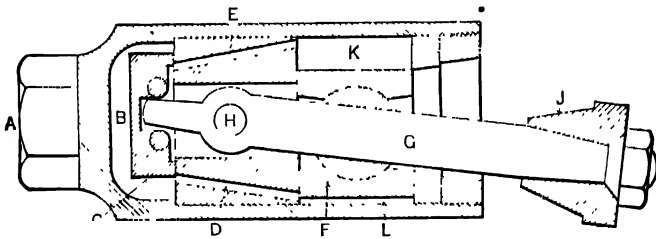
Mechanical Tube Cleaner — Hammer Type.
